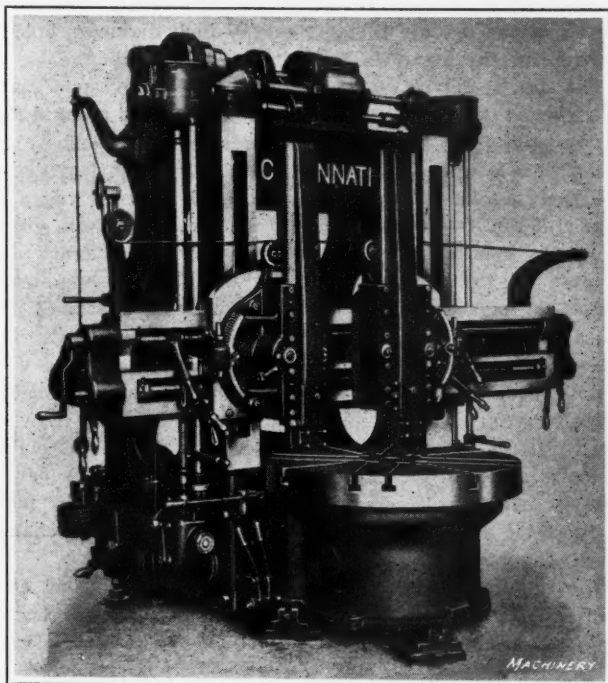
Boring Mill built in 42- and 48-inch Sizes by the Cincinnati Planer Co.
